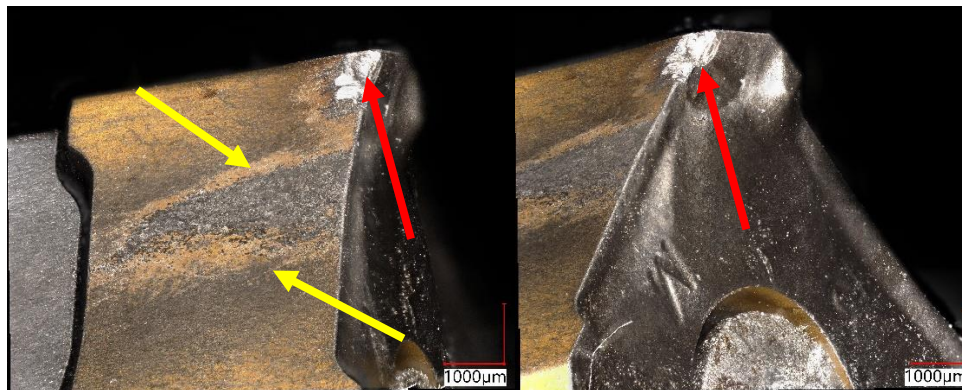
Main cutting edges and surfaces view of second insert, description in text.
